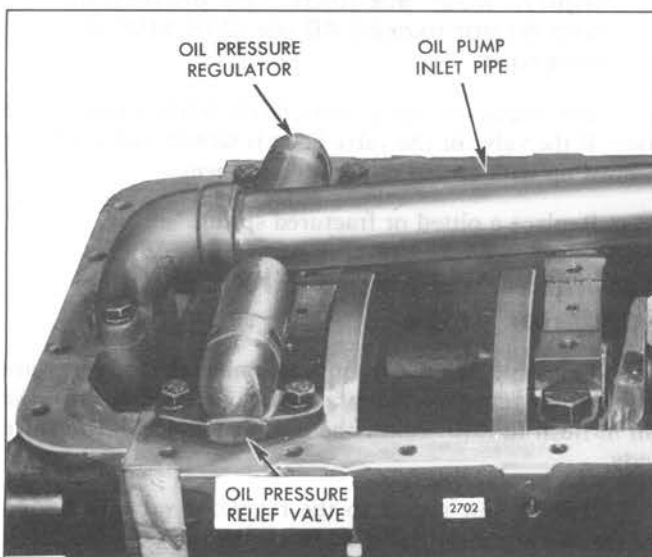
Oil Pressure Regulator Valve and Relief Valve Mounting (6V or 8V Engine Oil Pump in Front Cover)
